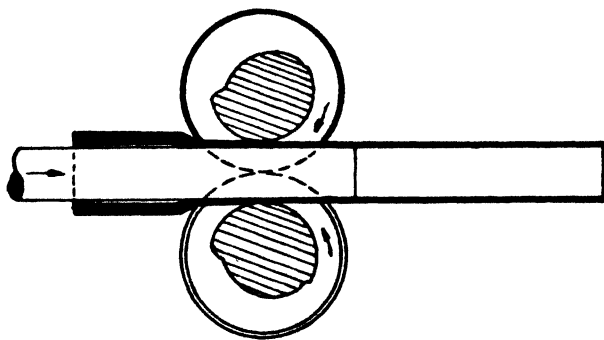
XV.—Cross section of the working parts of the Pilger mill.
